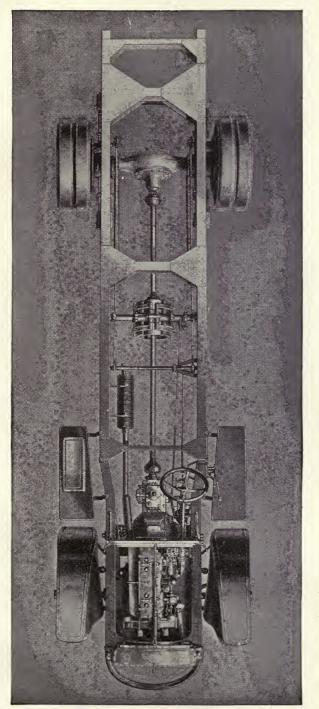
Plan view of the White 5-ton chassis with double reduction rear axle.
